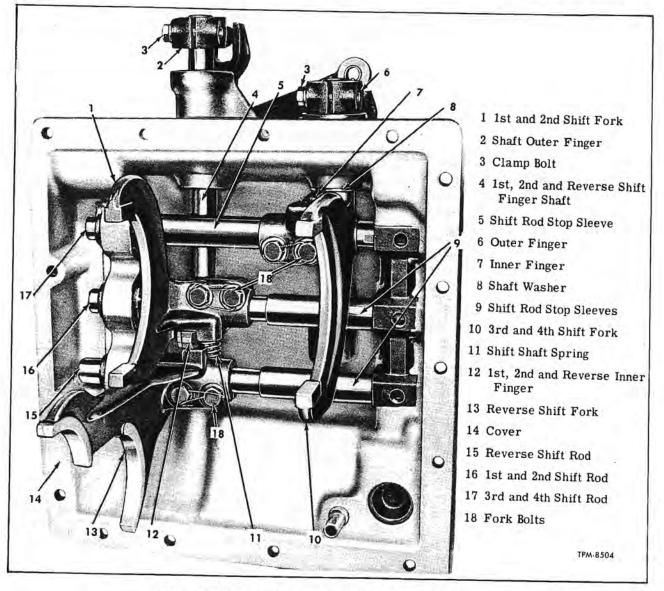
Transmission Cover with Forks and Shifting Mechanism
